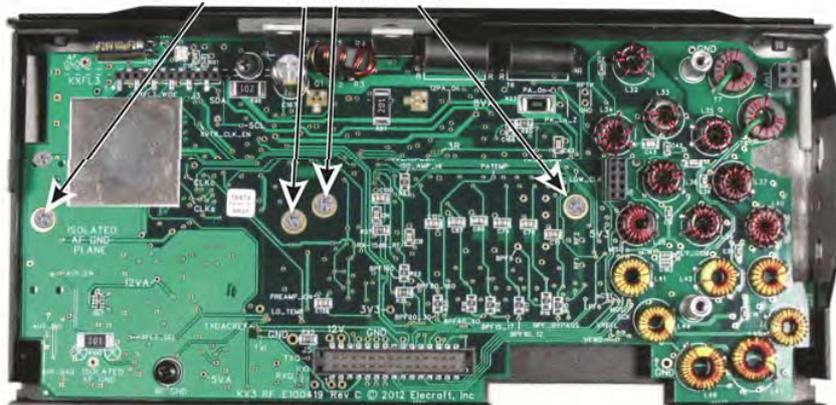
Checking the Alignment of the Battery Holder Standoffs.
